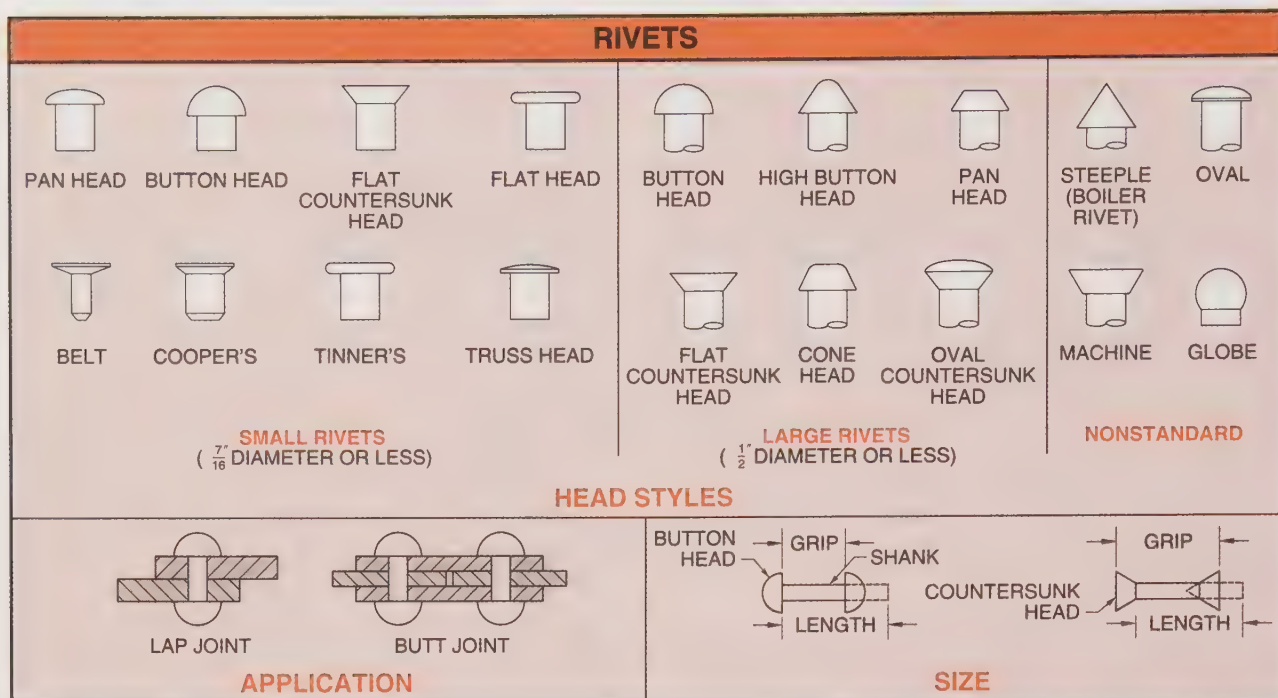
Rivets are nonthreaded fasteners used to join or fasten parts.
